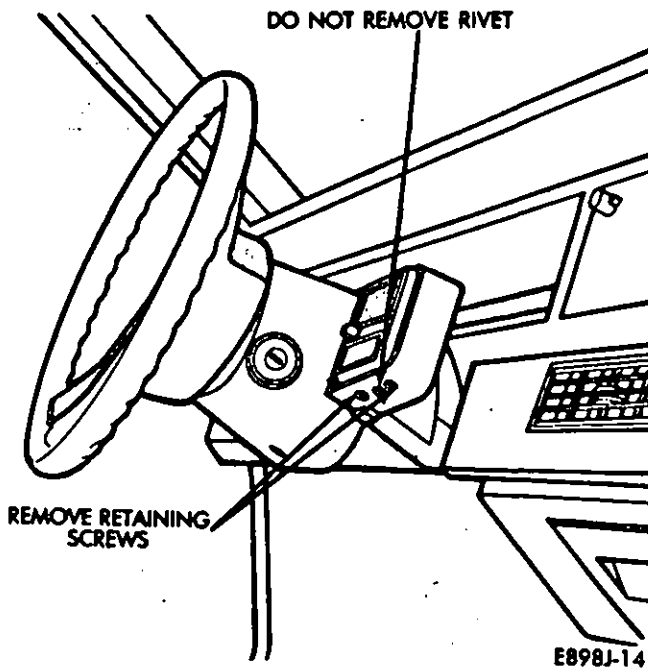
Remove Right Hand Switch Pod (Heat/AC) Retaining Screws
